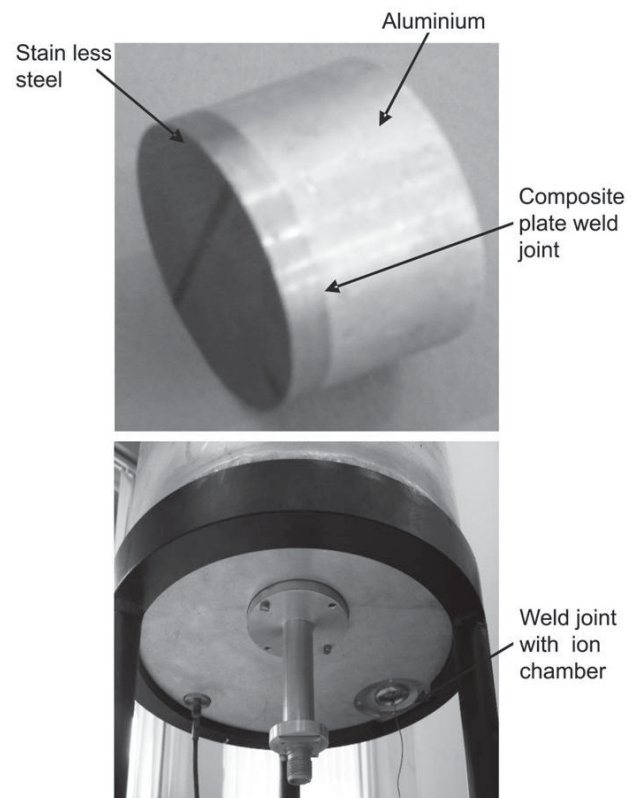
Photo of SS-Al clad plate and the weld joint
